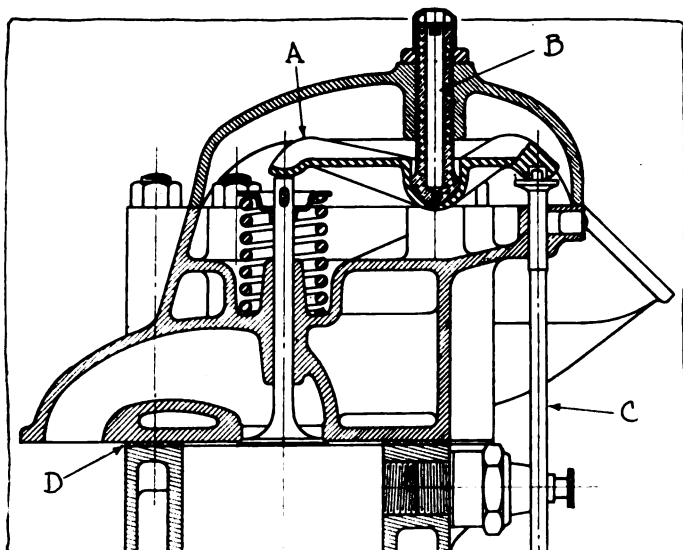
Valve mechanism of Brush-developed valve-in-head motor. A—Rocker arm. B—Rocker arm stud. C—Push rod. D—Armored asbestos gasket between cylinder and head
